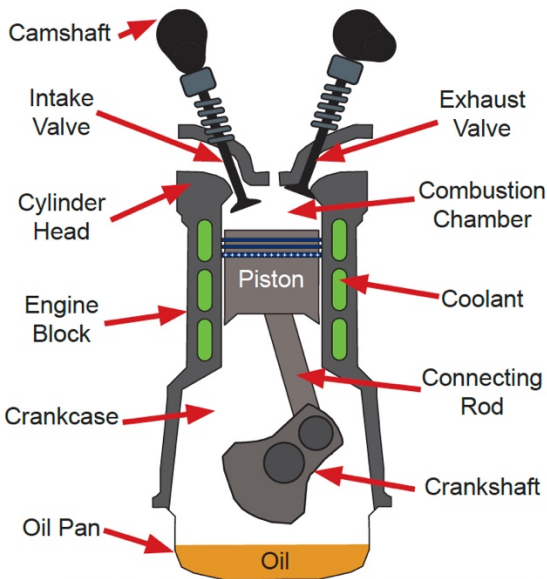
Dual Overhead Camshaft (DOHC) Engine
